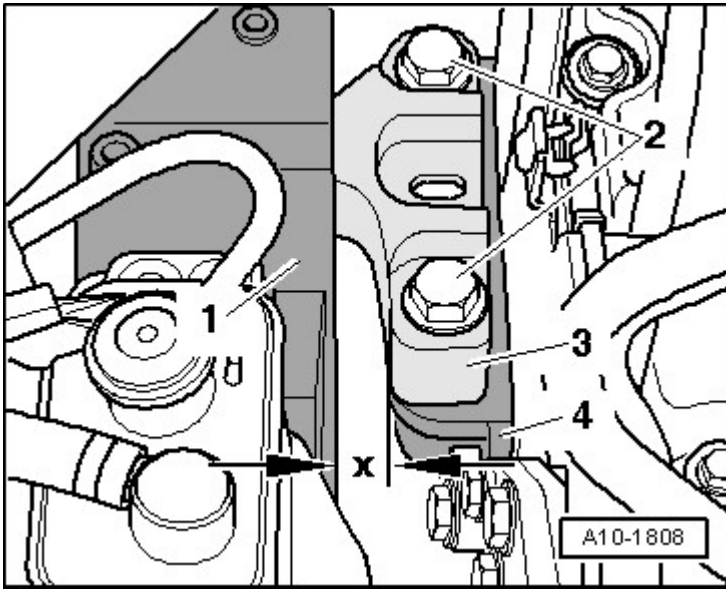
Checking Dimensions At Engine/Transmission Assembly Mounting
